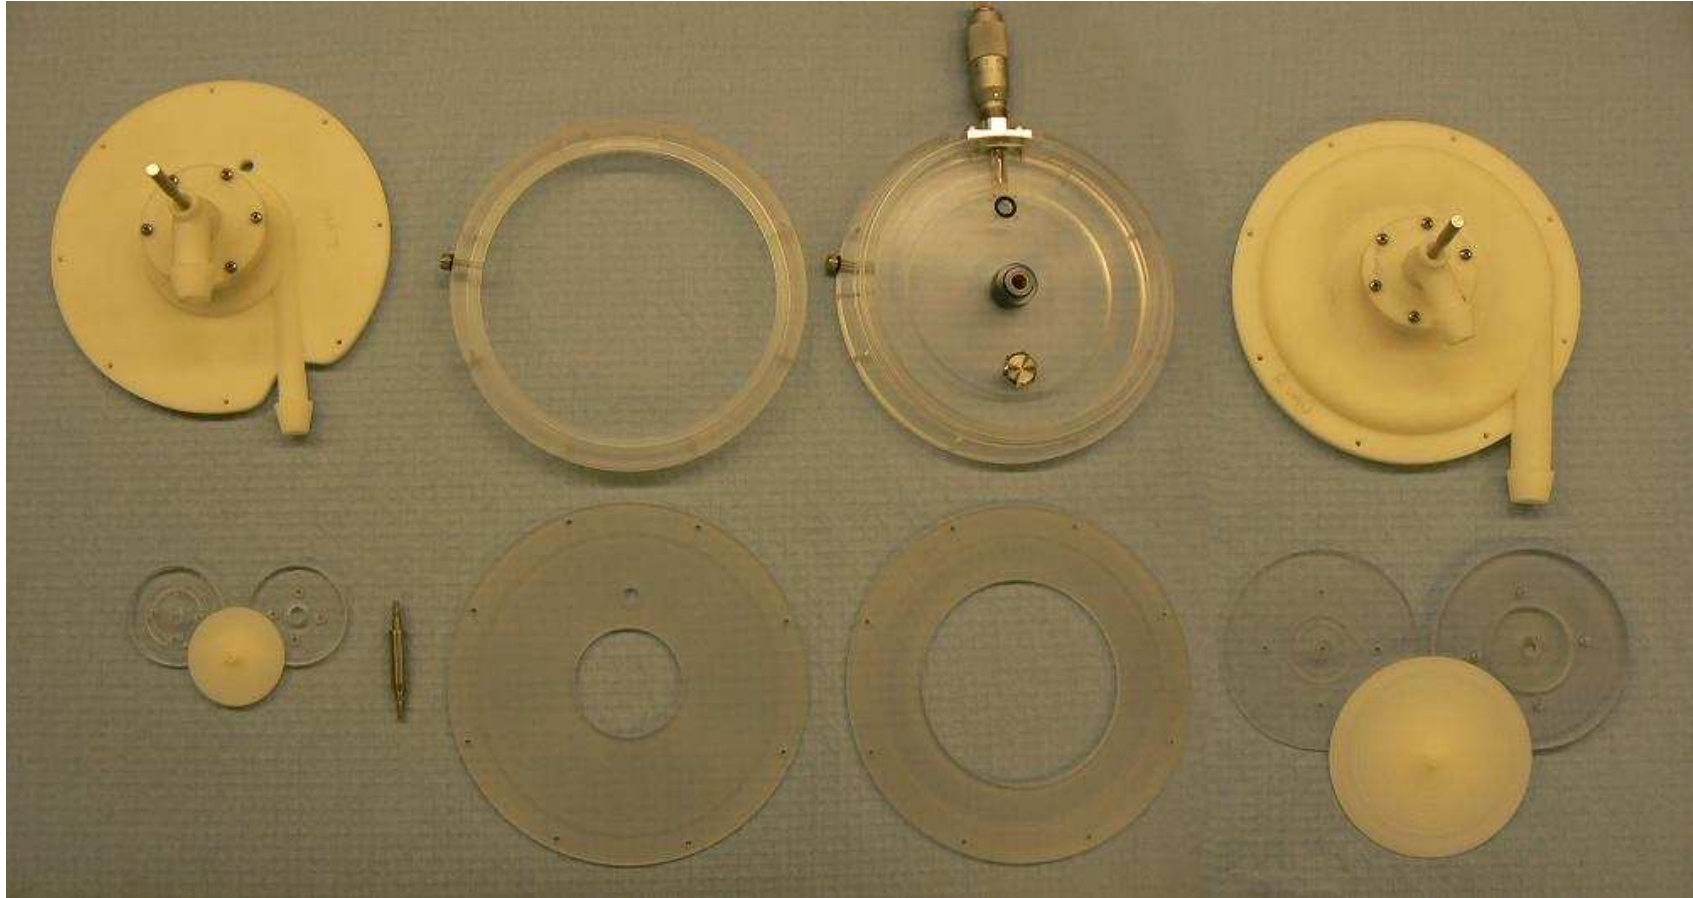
Passive Controller BiVAD components after manufacture, (landscape view). Clockwise from top left; Assembled LVAD with drive, Passive Controller Body upper, Passive Controller Body lower, assembled RVAD with drive, RVAD lower shroud assembly[#], RVAD to Controller Body mounting plate, LVAD to Controller Body mounting plate, floating assembly shaft[#], LVAD lower shroud assembly[#]. ([#] A component of the complete floating assembly).
